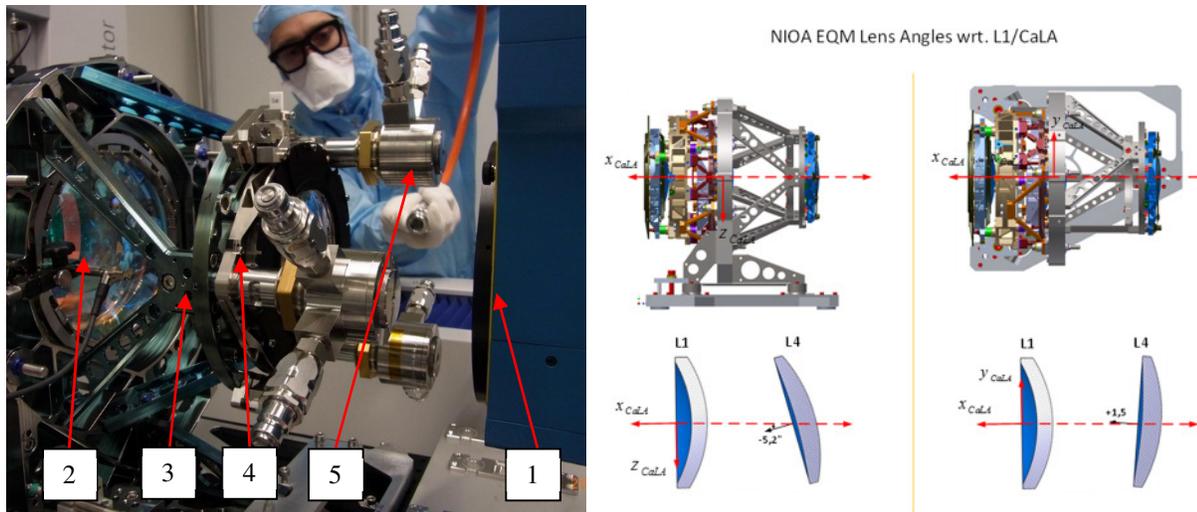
left: Assembly and alignment of CoLA lens relative to the CaLA Lens assembly: 1: Interferometer / alignment CGH; 2: L1 of CaLA; 3: Interface dummy between CaLA and CoLA; 4: CoLA Lens assembly; 5: Hydraulic bolt tensioner; right: achieved positional accuracy (tip/tilt) of CoLA relative to the L1 reference surface on CaLA, measured with a CMM.
